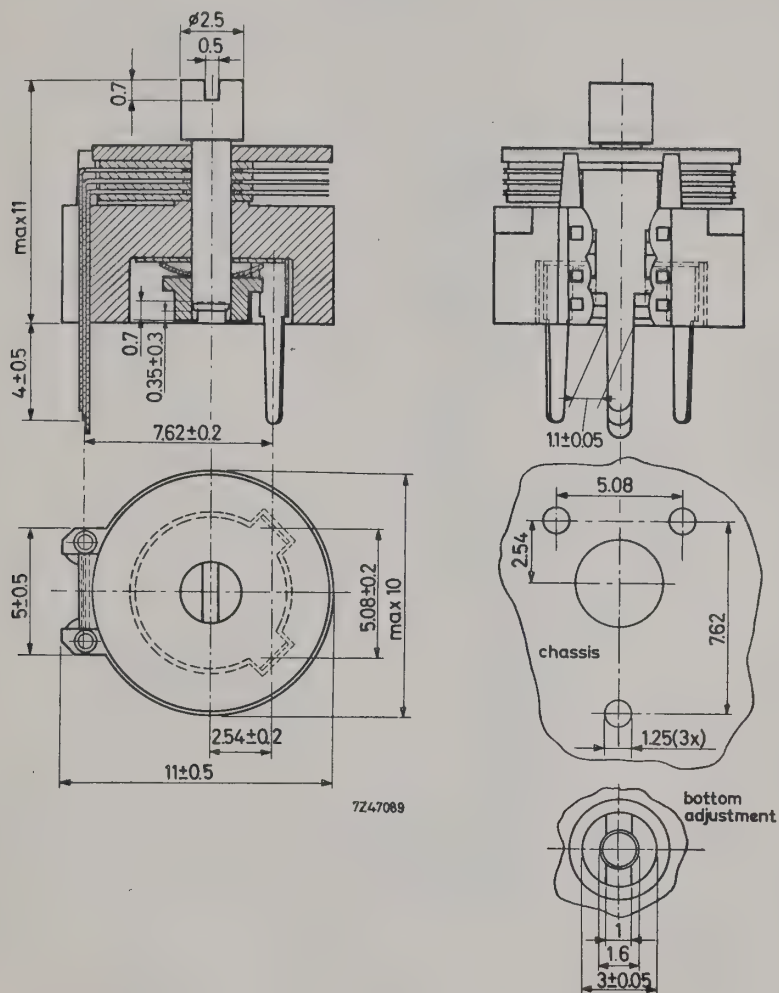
Main dimensions in mm of the trimmer C 010MA/60E with mounting diagram
